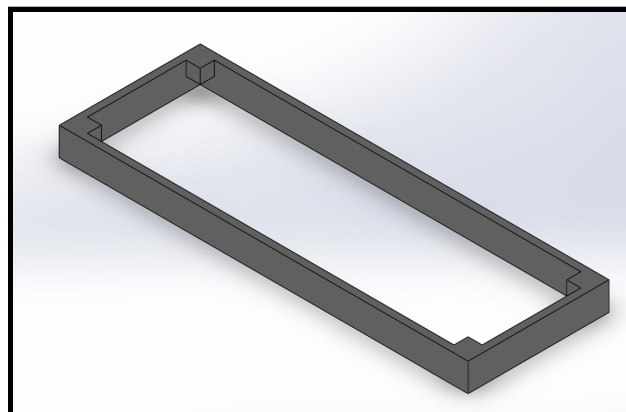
First Design of Picture Frame Initial Design for Glass Mount.
